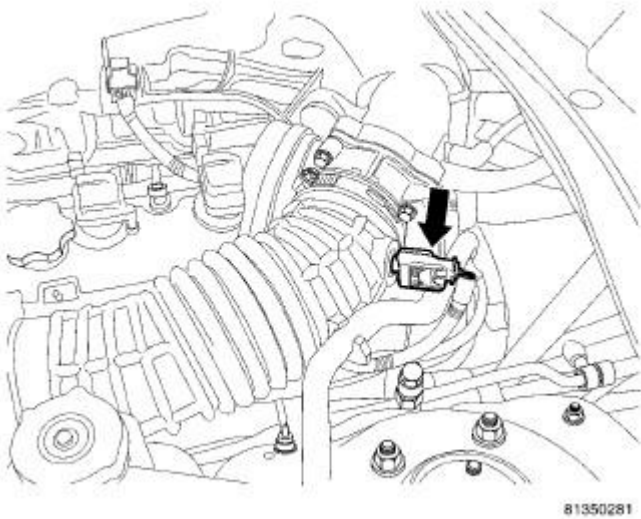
Locating Inlet Air Temperature Sensor - 3.5L
